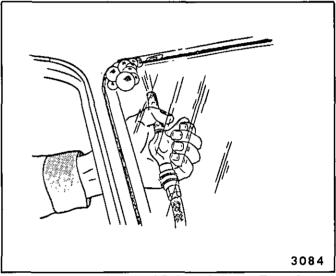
Air Hose and Bubble Solution Test of Windshield Glass Sealant
